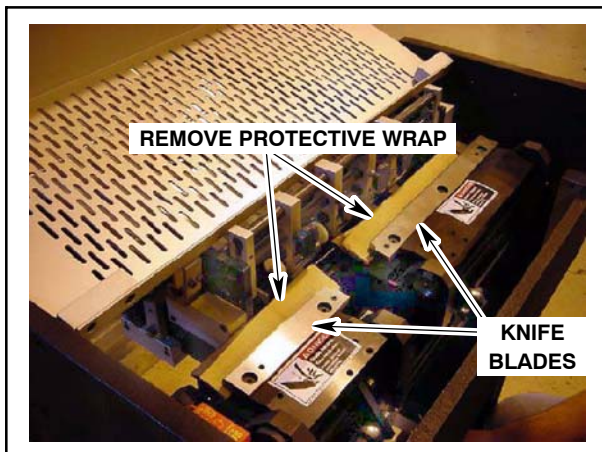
Remove Shipping Wrap from Knife Blades
